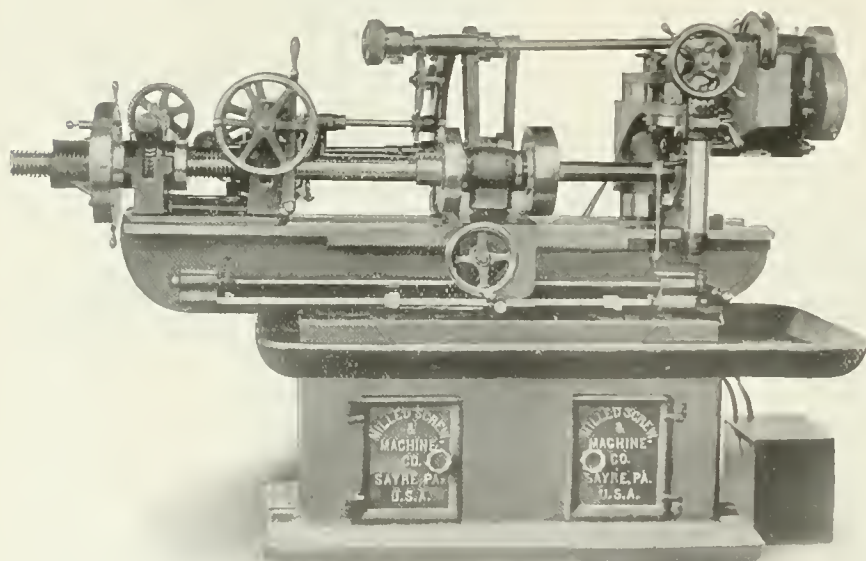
Six- by Twenty-four-inch Automatic Thread Milling Machine
